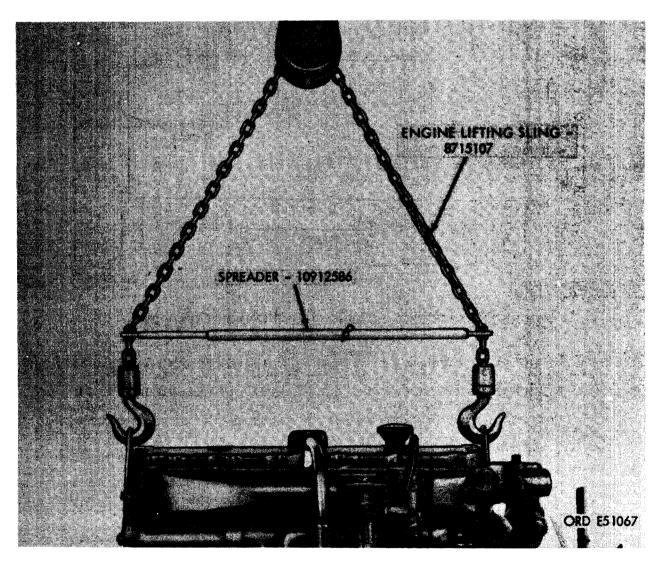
LIFTING ENGINE USING ENGINE LIFTING SLING.
